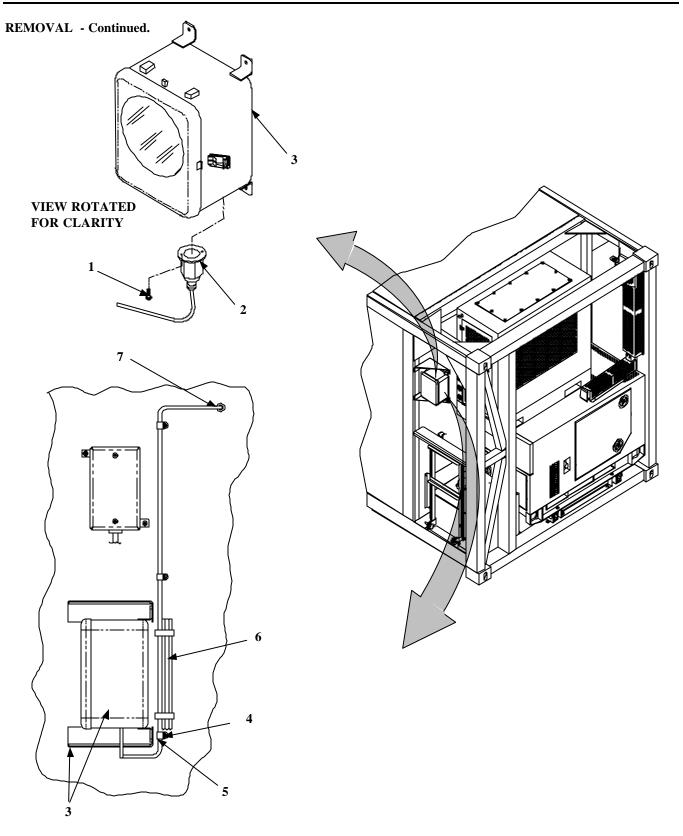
Recording Thermometer Element, Removal (Sheet 1 of 2)
